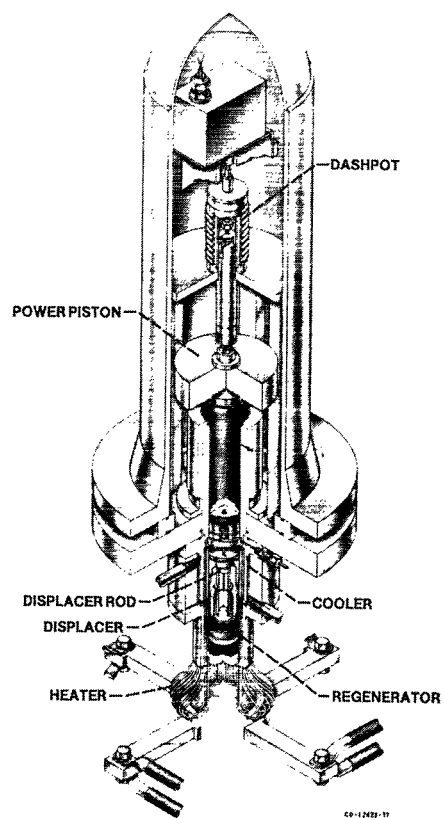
COMPONENT LAYOUT OF RE-1000 FREE PISTON STIRLING ENGINE.
